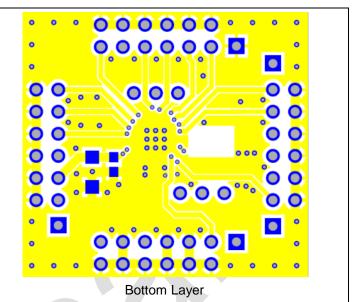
Layout ZIOL2401 Lab Kit Rev 2.1 Device Board
